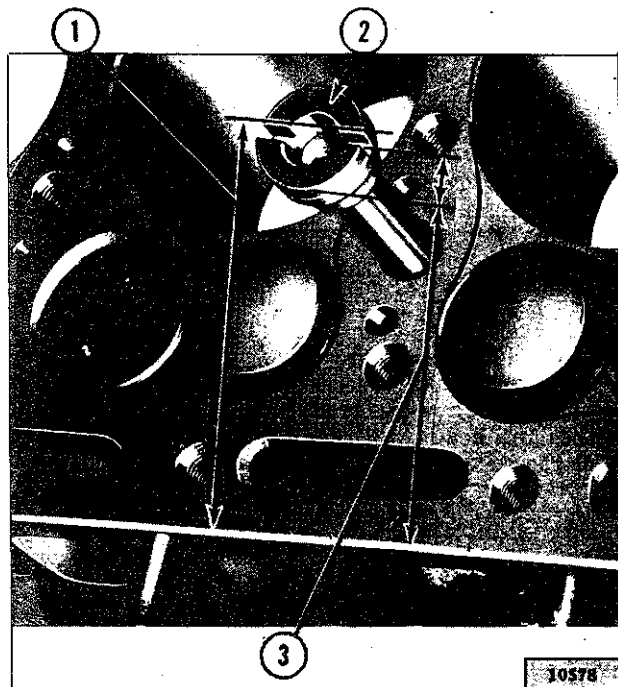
CORRECT POSITION OF DISTRIBUTOR MAIN DRIVE SHAFT
